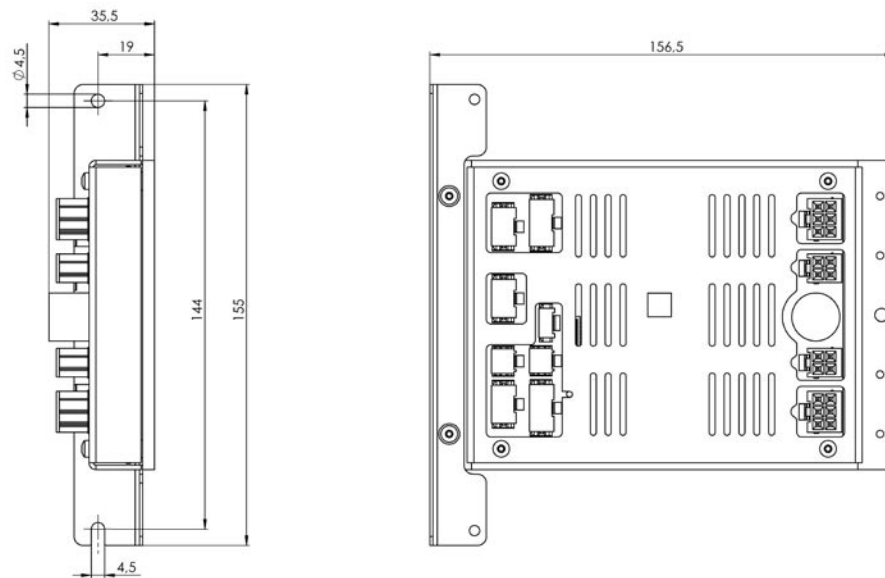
Vertical mounting of the ECOMiniDual with protective housing and mounting bracket
